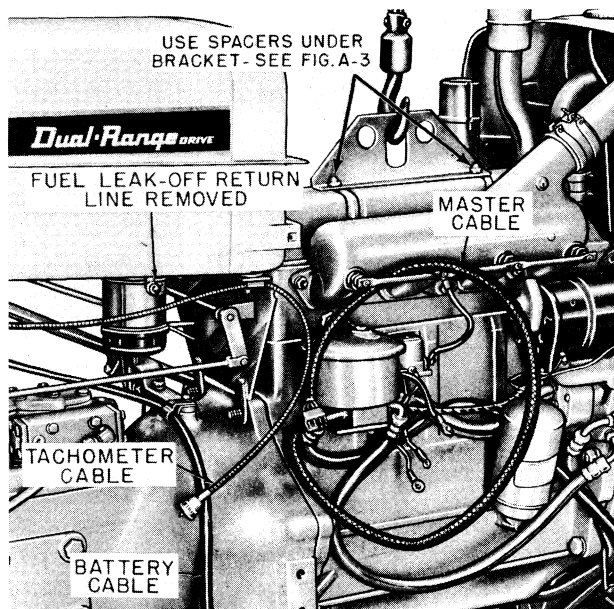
Preparing Diesel Tractor for Splitting R.H. View
